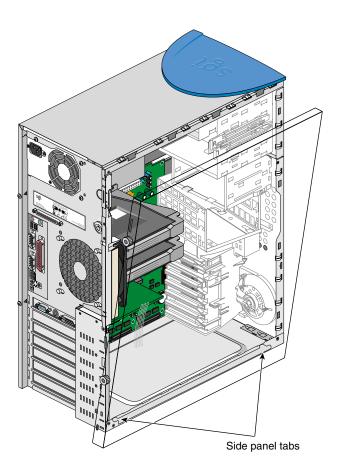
Placing Side Panel onto Lower Chassis Rail
